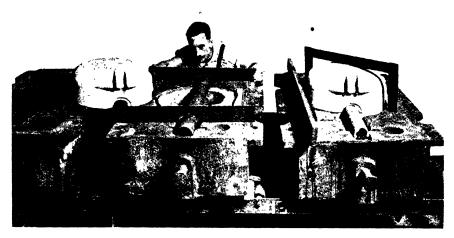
CHECKING THE SETTING OF CORES PRIOR TO CLOSING A LARGE MOULD
